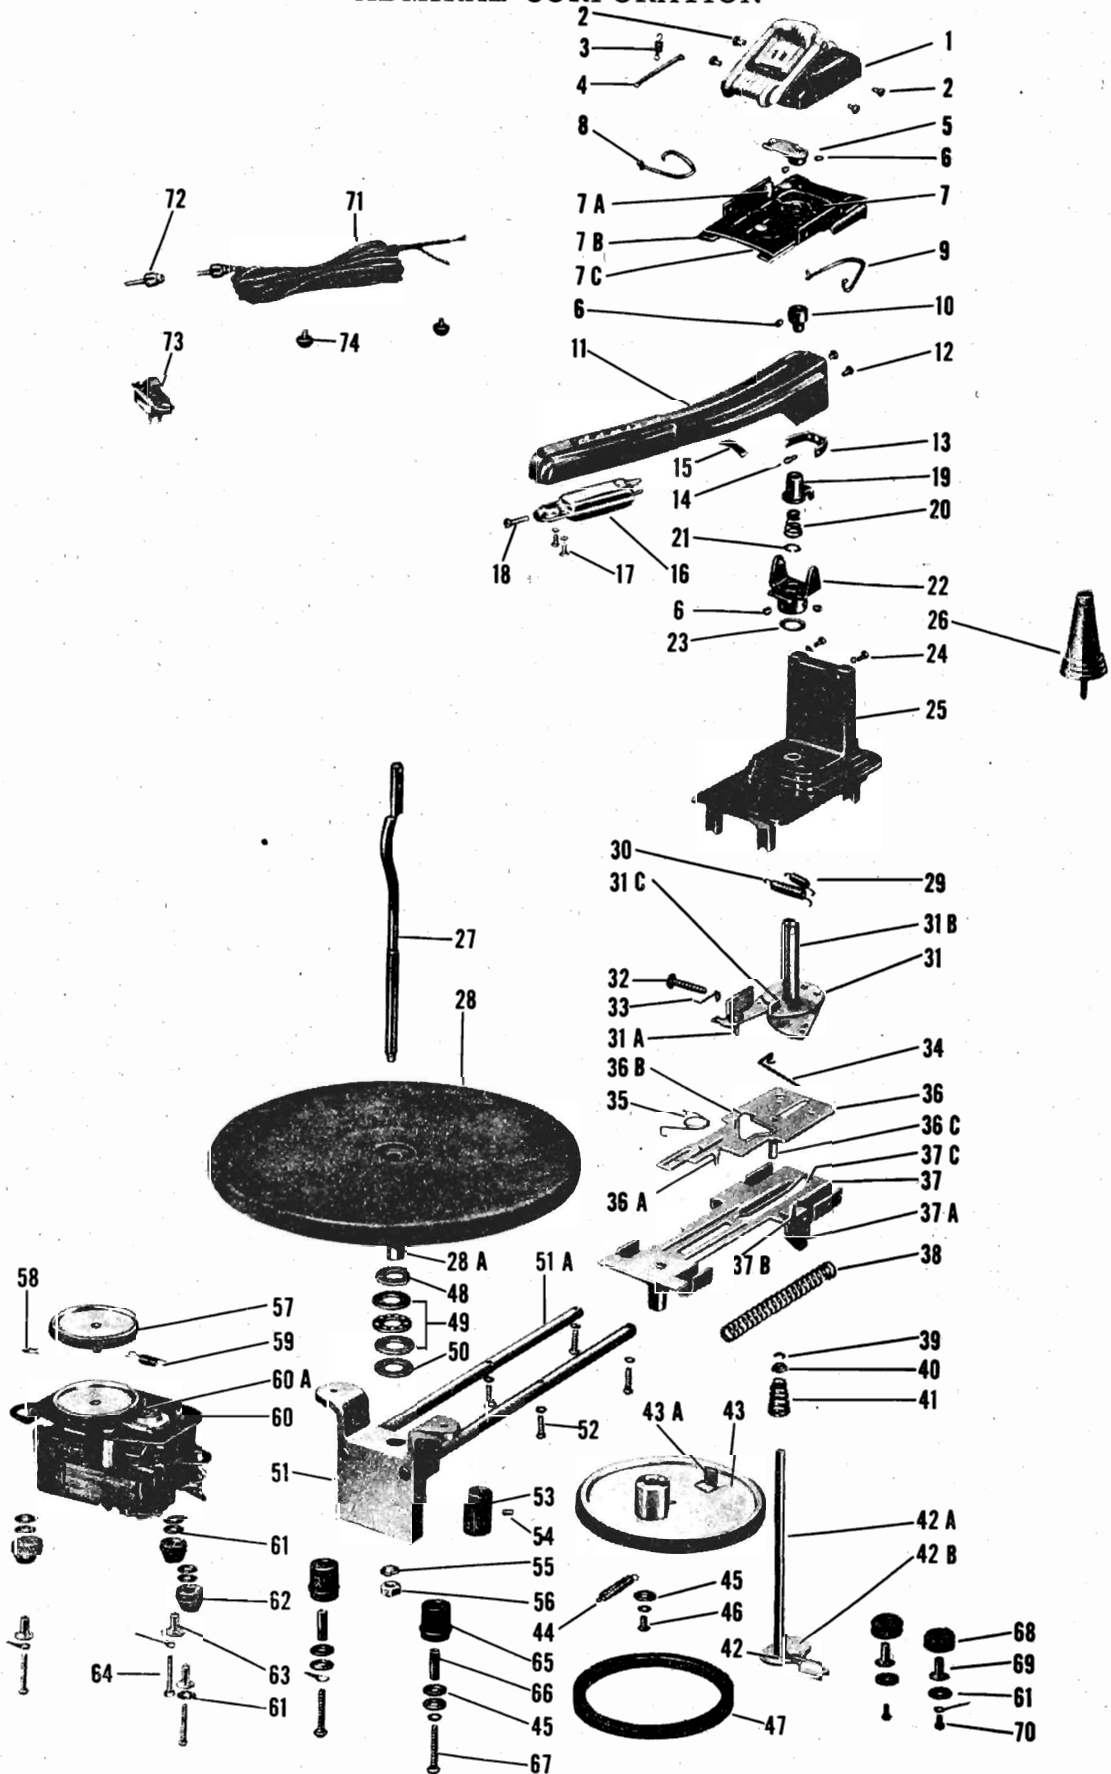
RECORD CHANGER, EXPLODED VIEW
